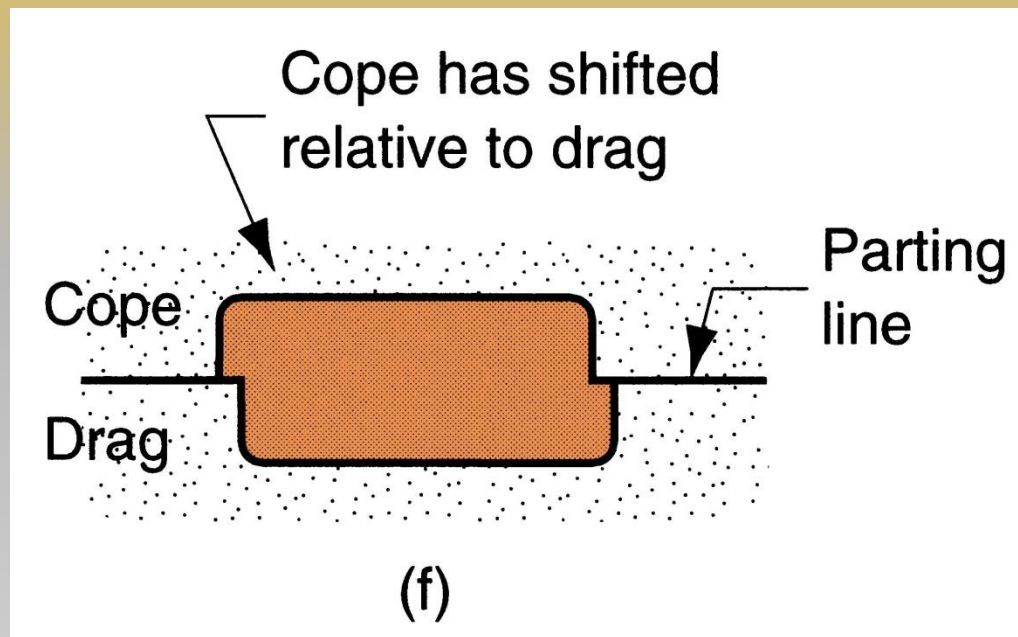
Common defects in sand castings: (f) mold shift
